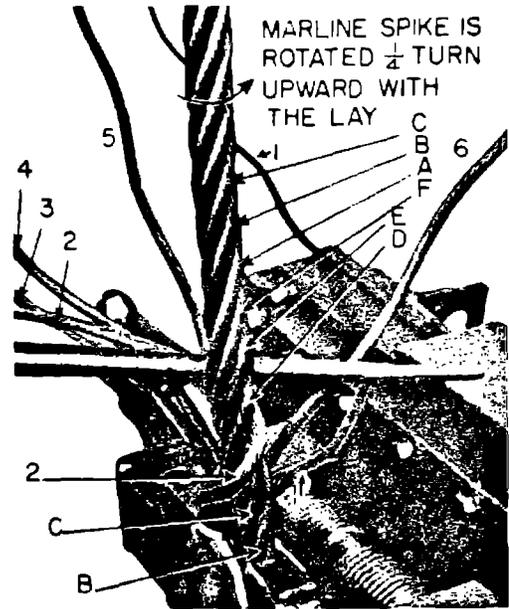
Passing Strand 2 Through the Hole Created by the Marline Spike.
